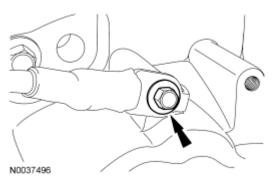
Locating Ground Wire Bolt Courtesy of FORD MOTOR CO.
